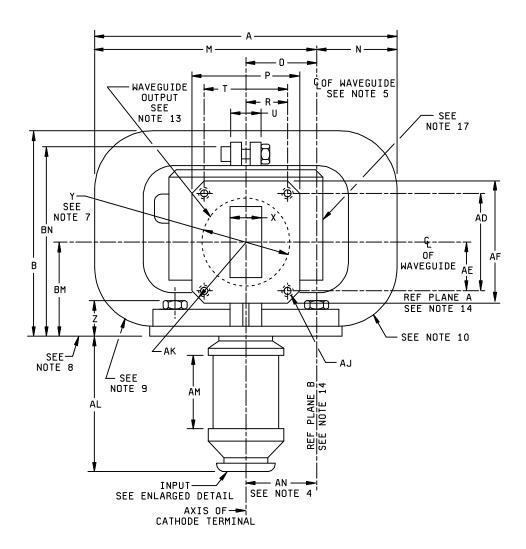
Outline drawing of electron tube type DOD-042 (front view).
